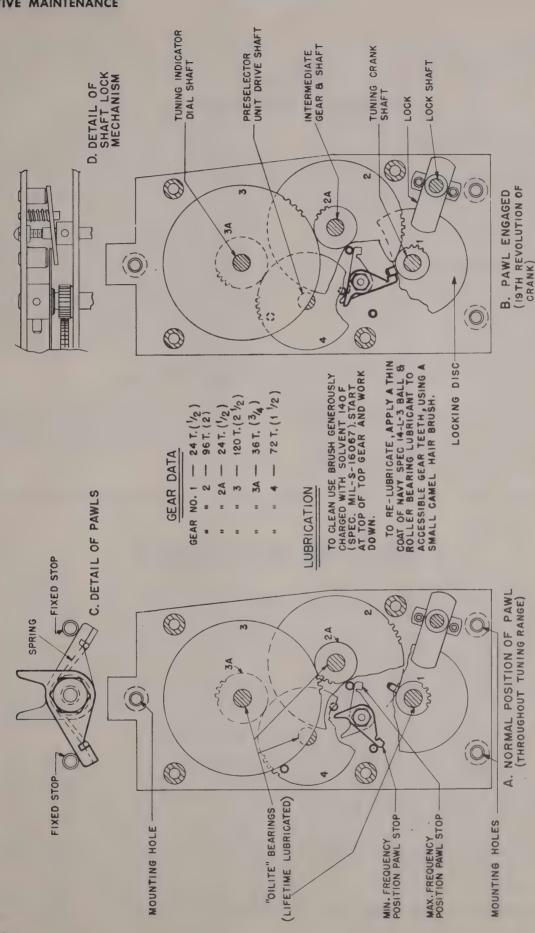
Dial-Drive Mechanism, Details and Lubrication
